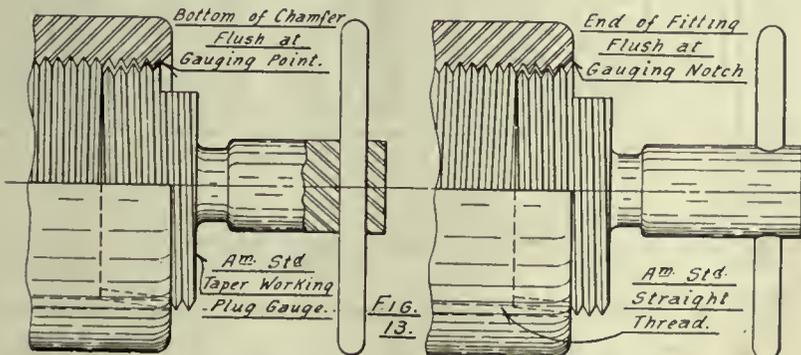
GAUGING STRAIGHT THREAD OR CHAMFERED COUPLING
